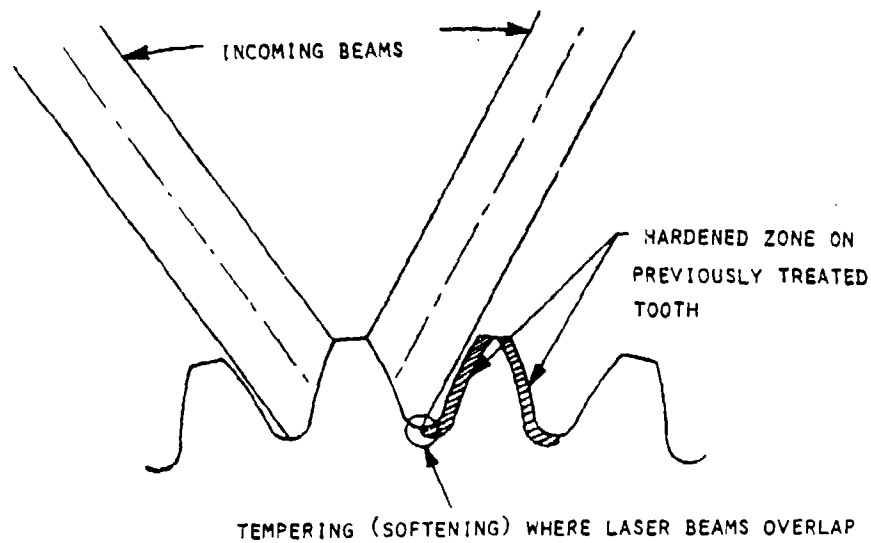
Laser hardening of gear teeth - Root-Flank-Flank-Root (RFFR) technique.
